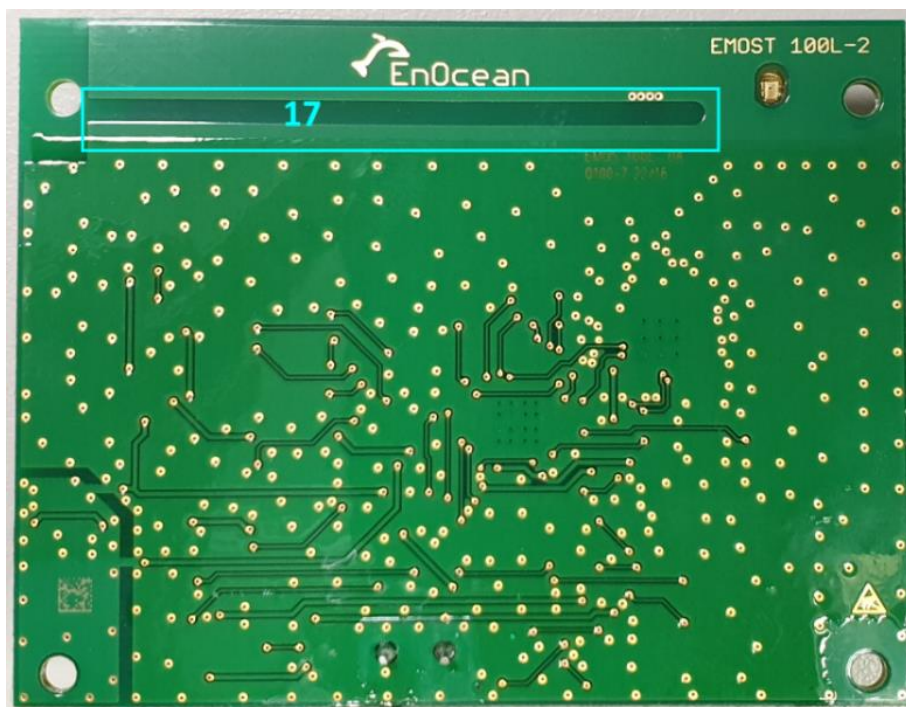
Bottom side of the assembled sensor module PCB with the marked integrated PCB slot antenna.
